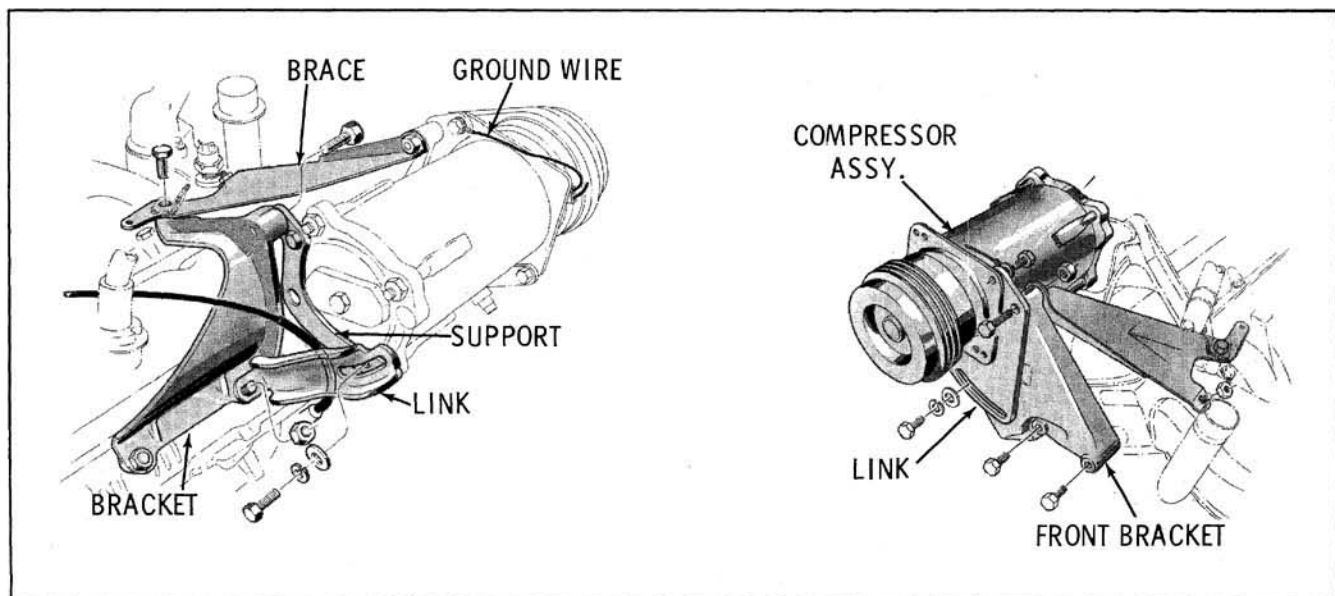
Compressor Mounting (52 through 86 Series)
